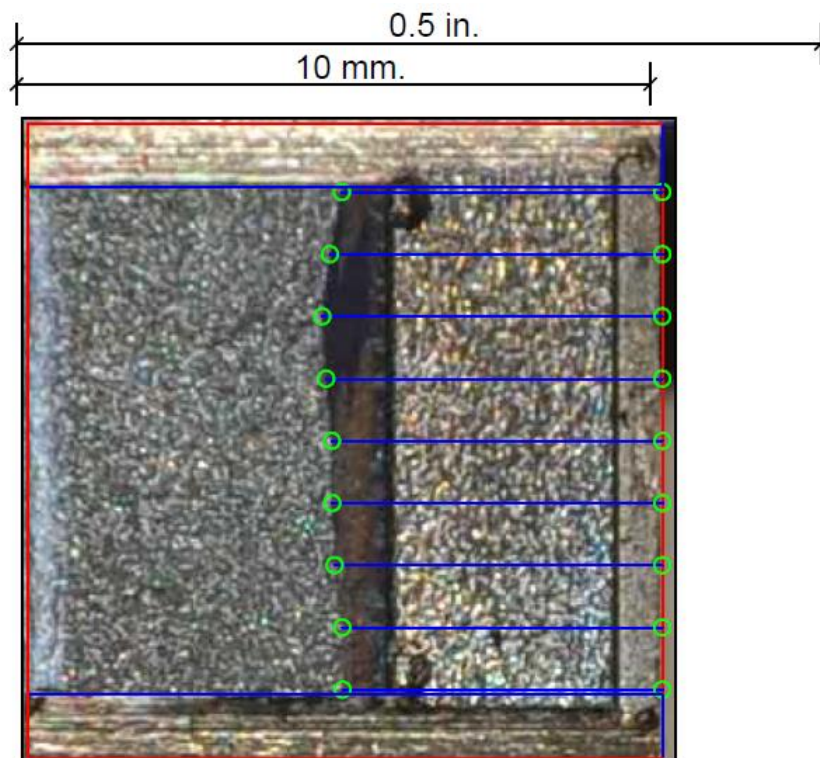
Specimen I5' Fracture Surface
